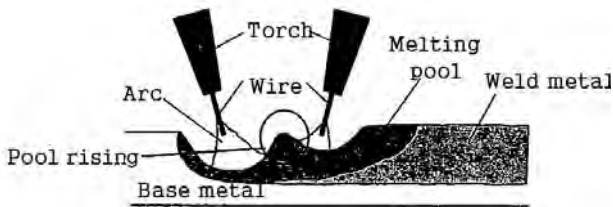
Schematic of Tandem MAG welding [4]
